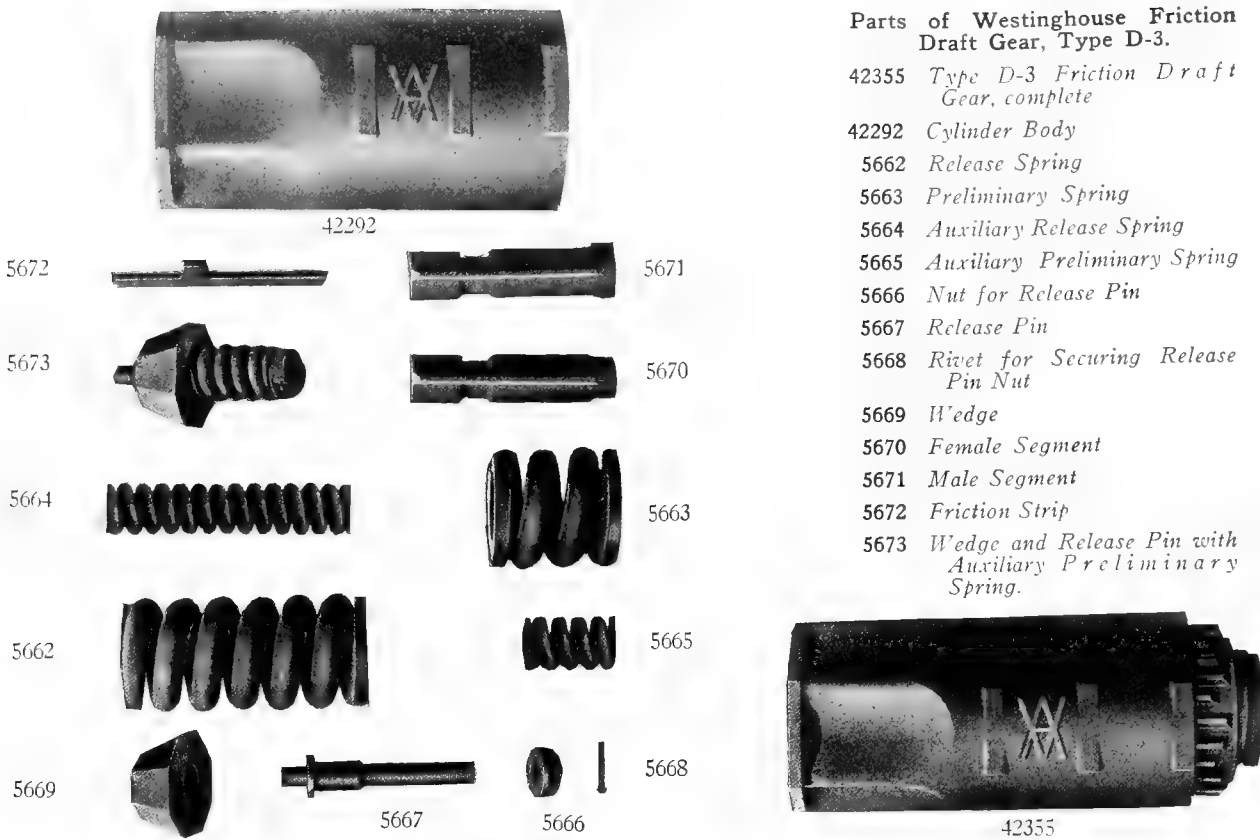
Details of Westinghouse Friction Draft Gear. Westinghouse Air Brake Company.
